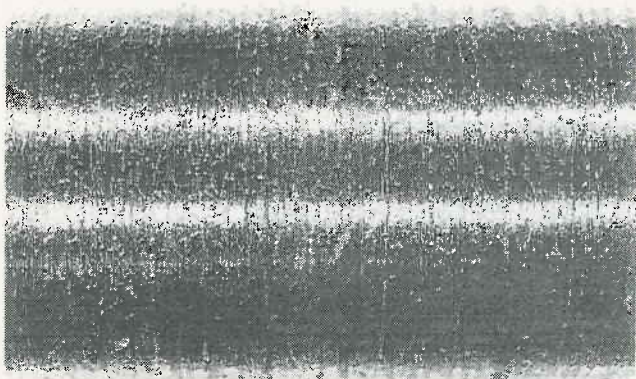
Outer surface of tube specimen. Short wave infra-red spot with preheating.
